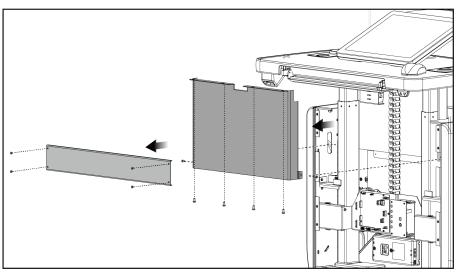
Remove chassis support bracket (left) in order to remove front shroud (center)
